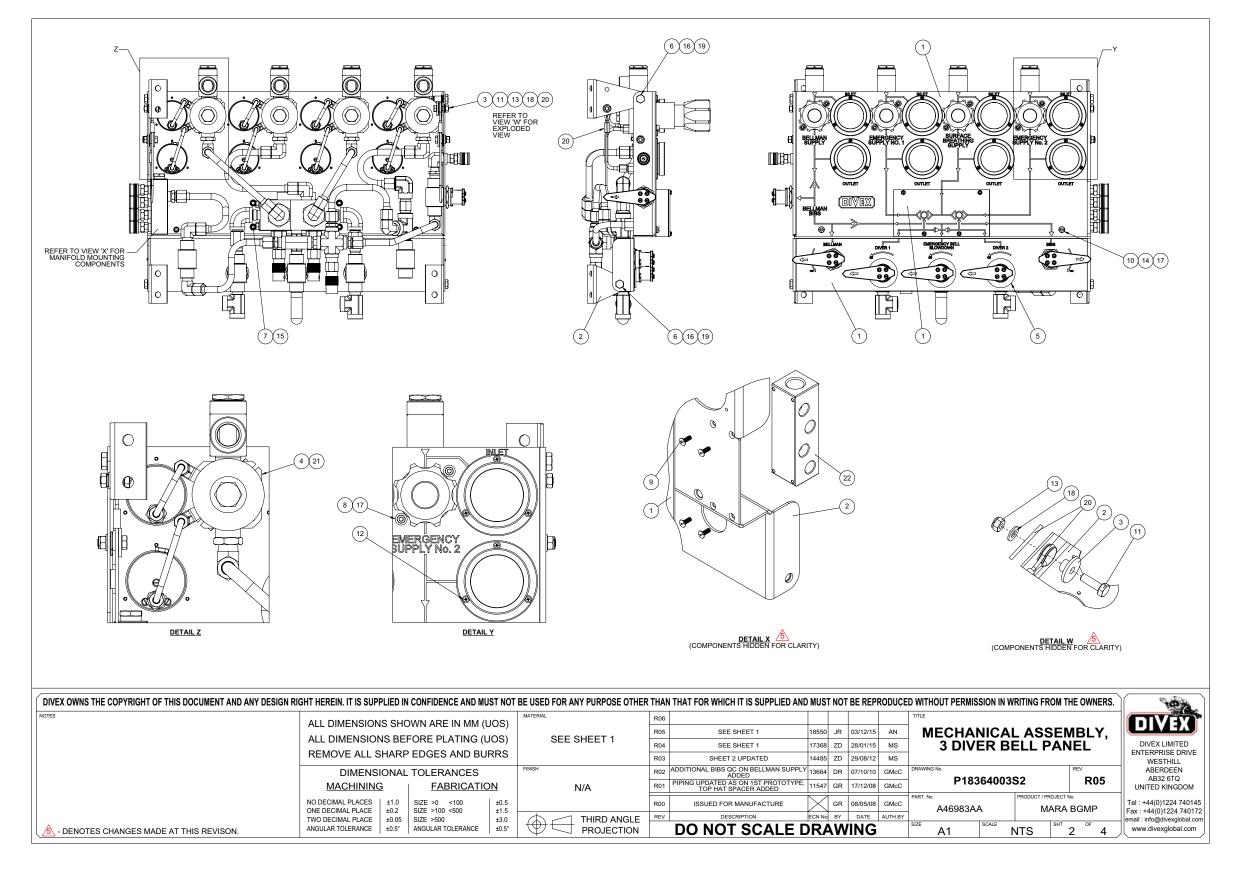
Gas Management Panel, Mounting Components (Drawing P18364003S2)
